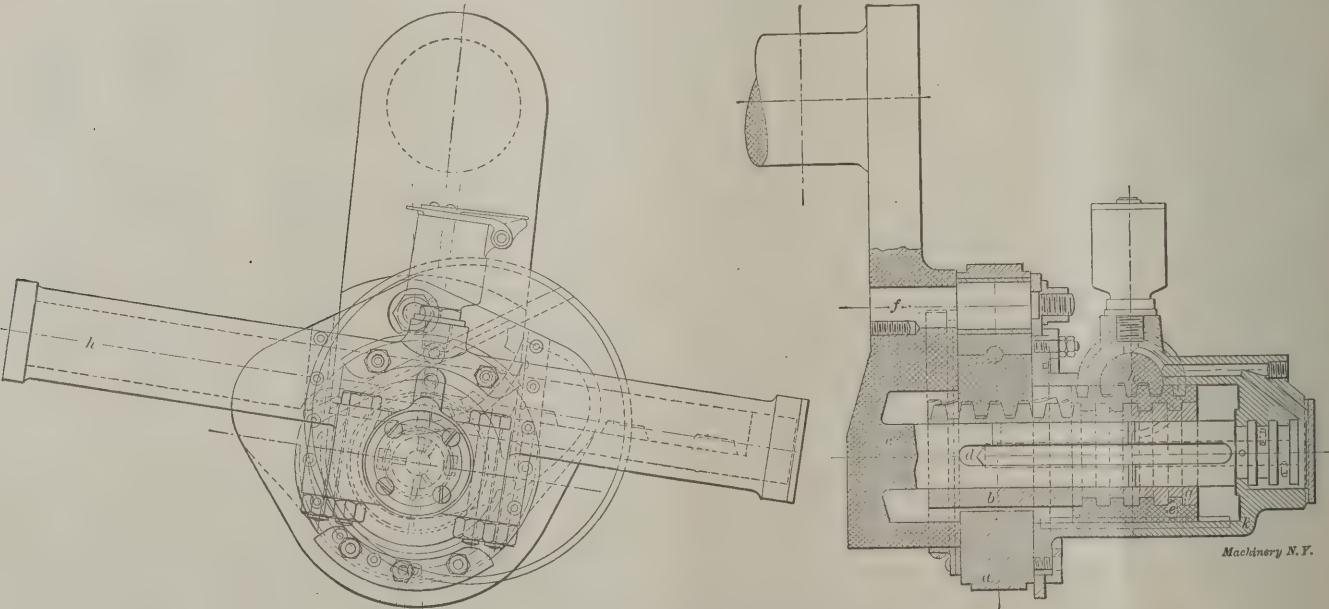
Section and Side View of the Lentz Reversing Mechanism.
